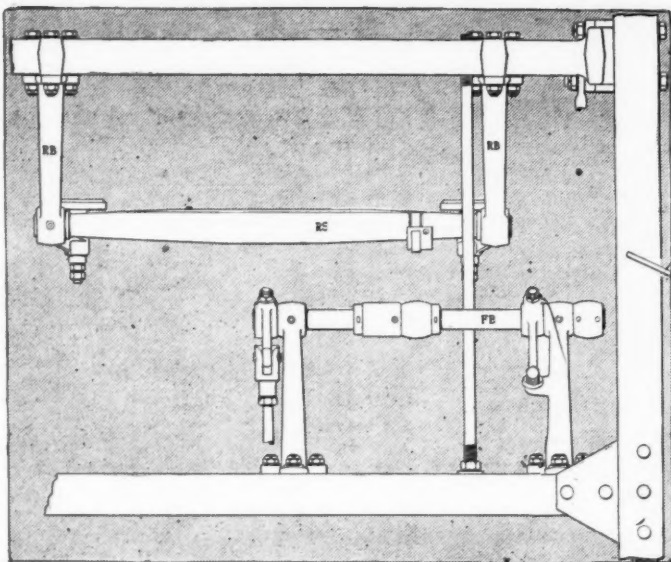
Method of supporting the clutch rocker shaft on the frame
